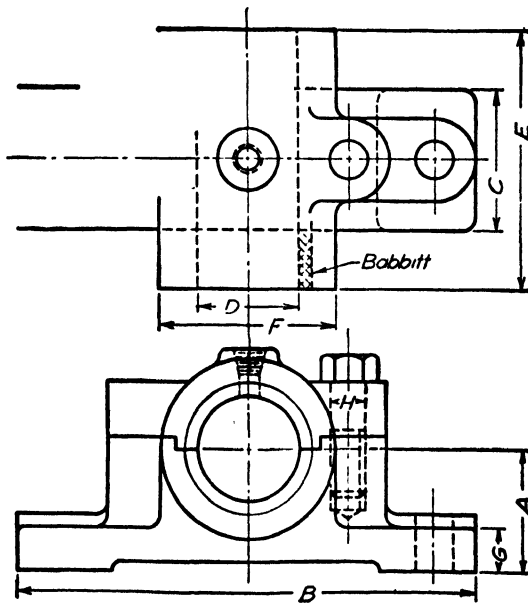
Babbitted bearing. Probs. 261 to 264.
